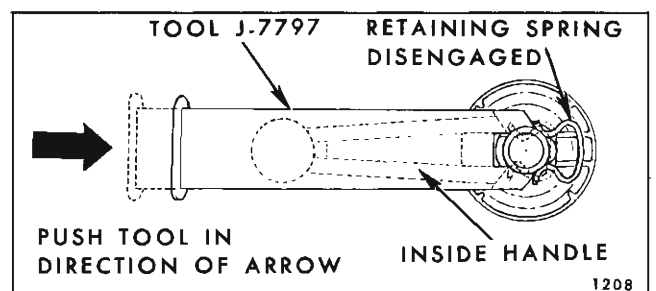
D3—Disengaging Door Inside Handle Retaining Spring
